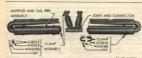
Muffler and Tail Pipe Assemblies, and Joint and Connector (3) Remove nuts and lock washers from %-inch can screws
